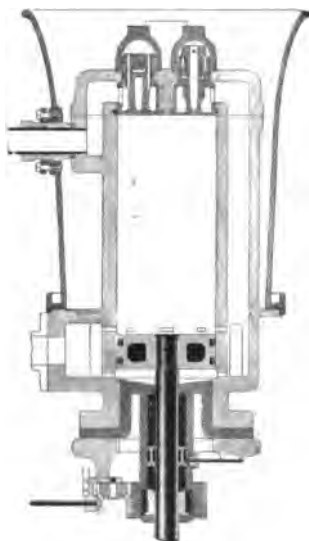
SECTION OF HERCULES COMPRESSOR.
